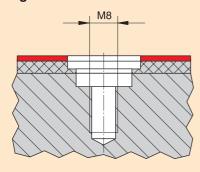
Installation of deva.tex® sliding plates with countersunk screws and fixing clamp
